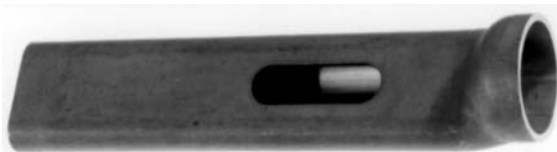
Part of air conditioner (A3003) of motor car forged by Miyamoto Industry Co.
